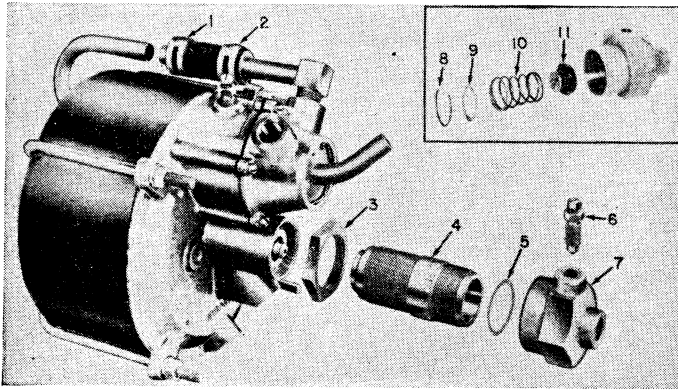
Disassembly of hydraulic cylinder. Inset shows end cap with residual line pressure check valve
